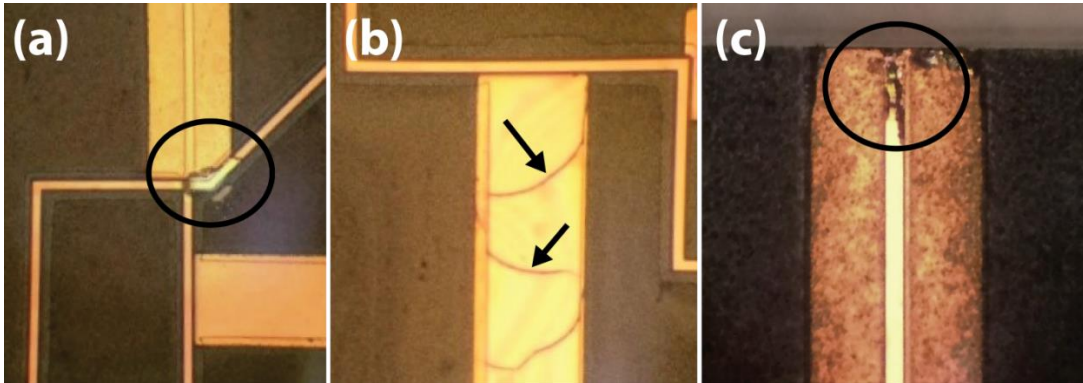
Defects found during visual inspection. (a) Broken liquid core (b) Broken solid core MMI (c) Broken facet
